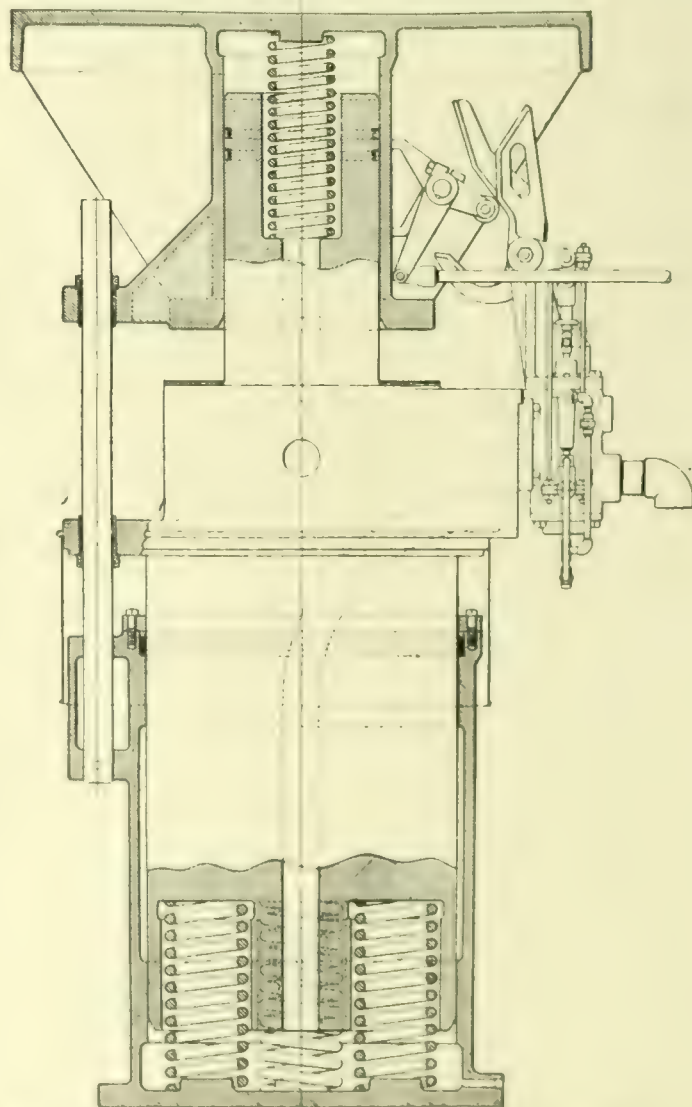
SHOCKLESS JARRING MACHINE. SECTIONAL ELEVATION
